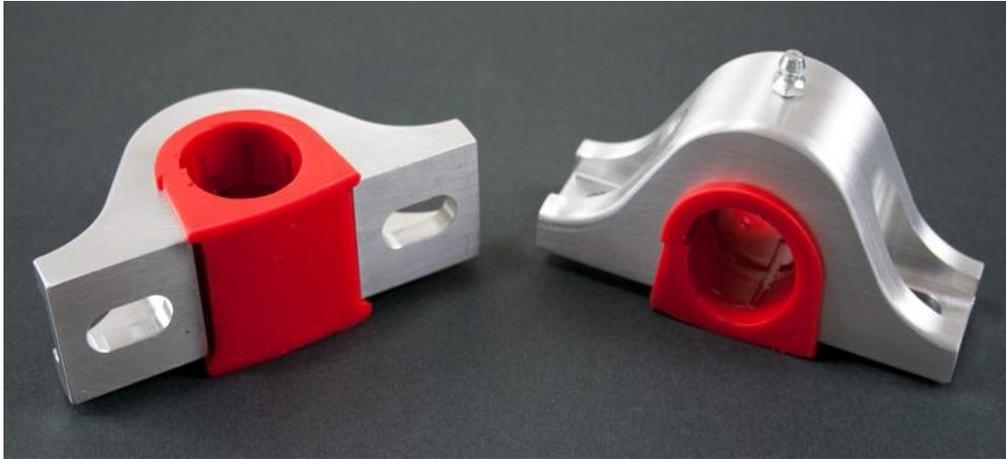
Stabilizer Bar Mounting Mass Reduced Component Example
